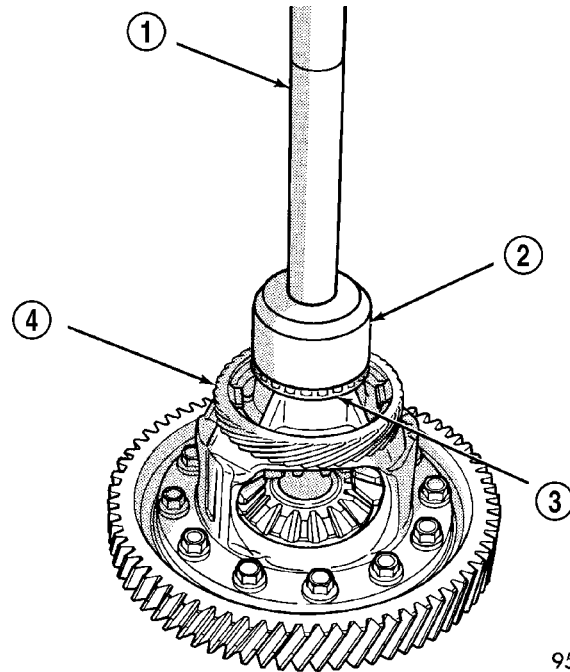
Install Differential Bearing Cone to Diff. Case Side
